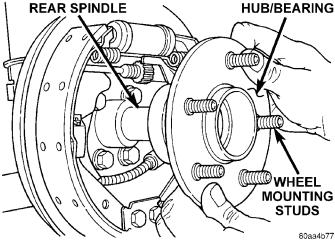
Hub/Bearing Removal From Spindle (Drum Brakes Shown)
